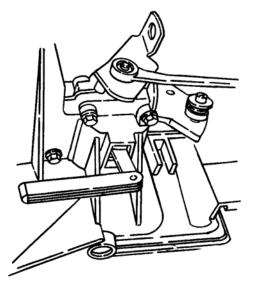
Brake Adjustment Nut With Feeler Gauge
